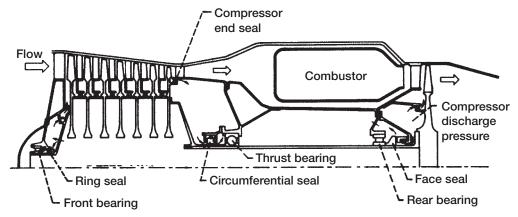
Engine schematic showing main-shaft seal locations. (Ludwig, 1978.)
